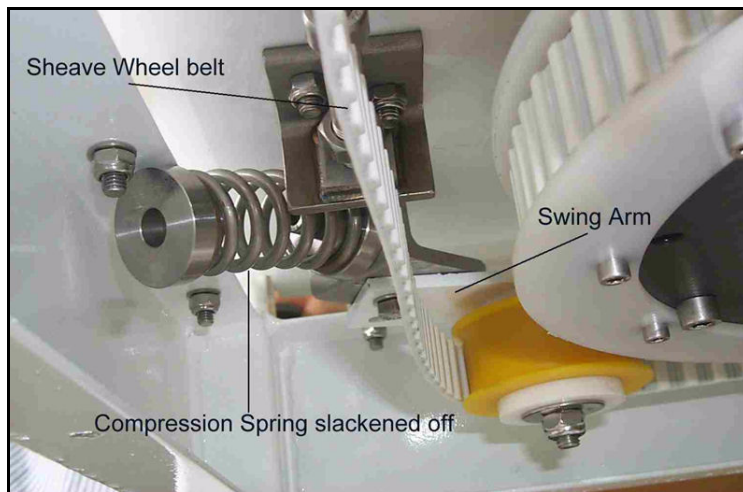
Sheave Wheel Belt Slackened Off for Removal
